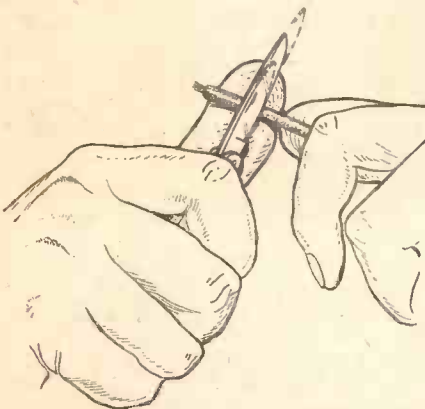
If insulated wire is scraped as shown here—there is danger of cutting through the wire.
